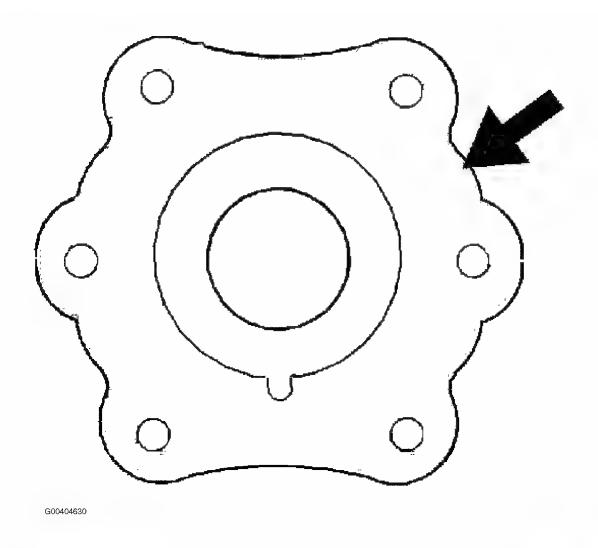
Applying Sealer To Inside Edge Of Bearing Retainer Mating Surface
